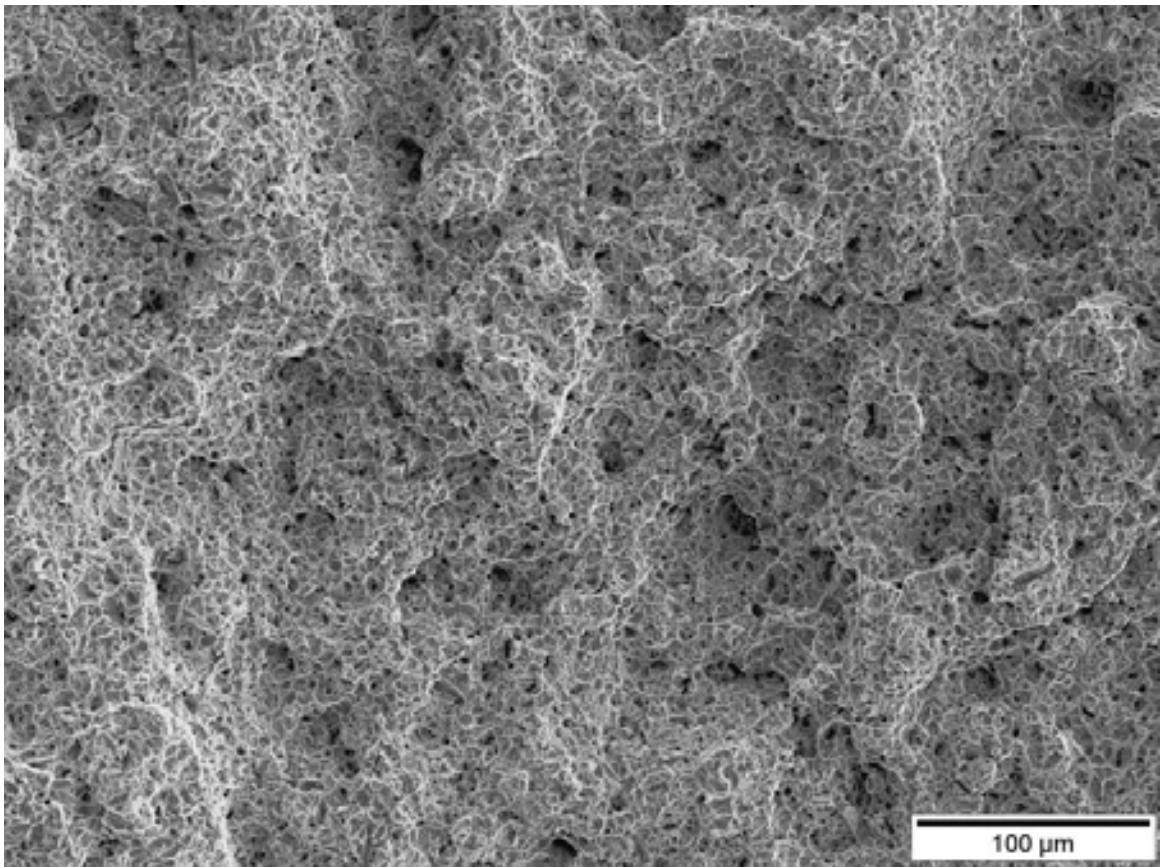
Fracture surface of extruded Ti-6Al-4V-1B modified alloy showing a relatively ductile fracture behavior.
